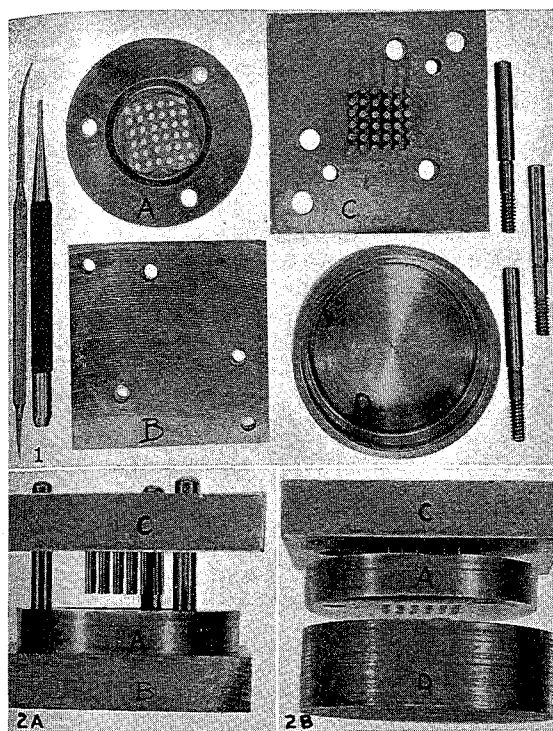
COMPONENTS OF THE PELLET MACHINE. (a) mold; (b) flat steel plate with machine ground surface; (c) die with plungers corresponding to holes in mold; (d) receptacle. Fig. 2A. PELLET MACHINE ASSEMBLED AND READY FOR COMPRESSION AFTER THE POWDERED CRYSTALLINE ANDROGEN HAS BEEN PACKED IN THE HOLES. (a) mold; (b) flat steel plate; (c) die. Fig. 2B. PELLET MACHINE PARTIALLY DISASSEMBLED AFTER COMPRESSION, READY FOR EXPULSION OF THE PELLETS. (a) mold; (c) die; (d) receptacle.
